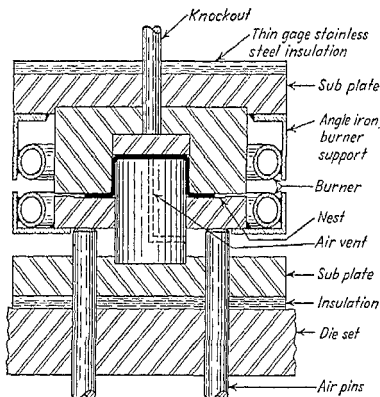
An inverted-type heated draw die (size of gas pipe is exaggerated).⁶
